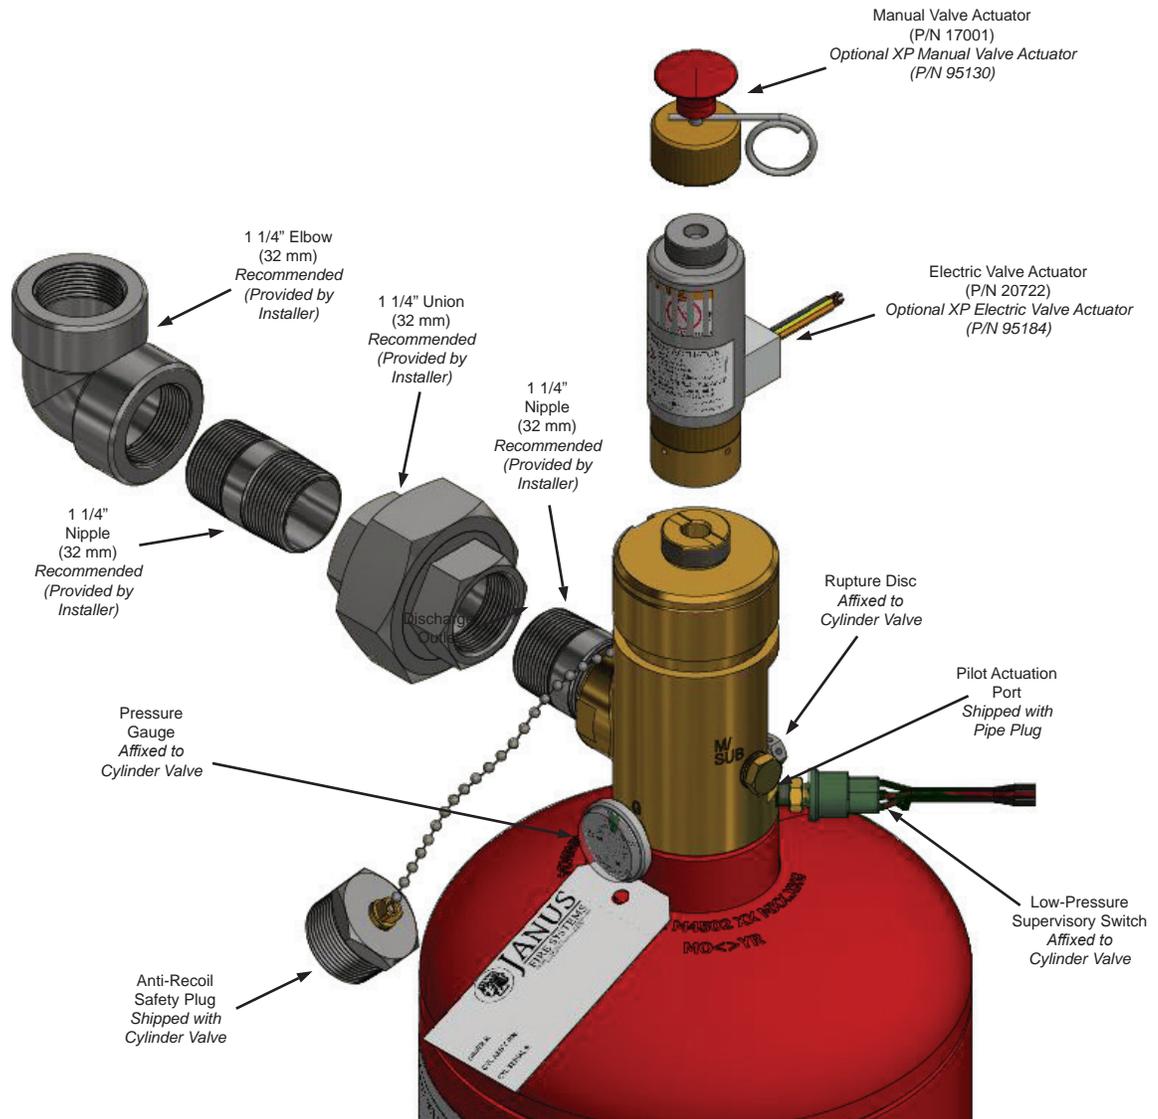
Sv Cylinder Valve w/ Trim Kit
